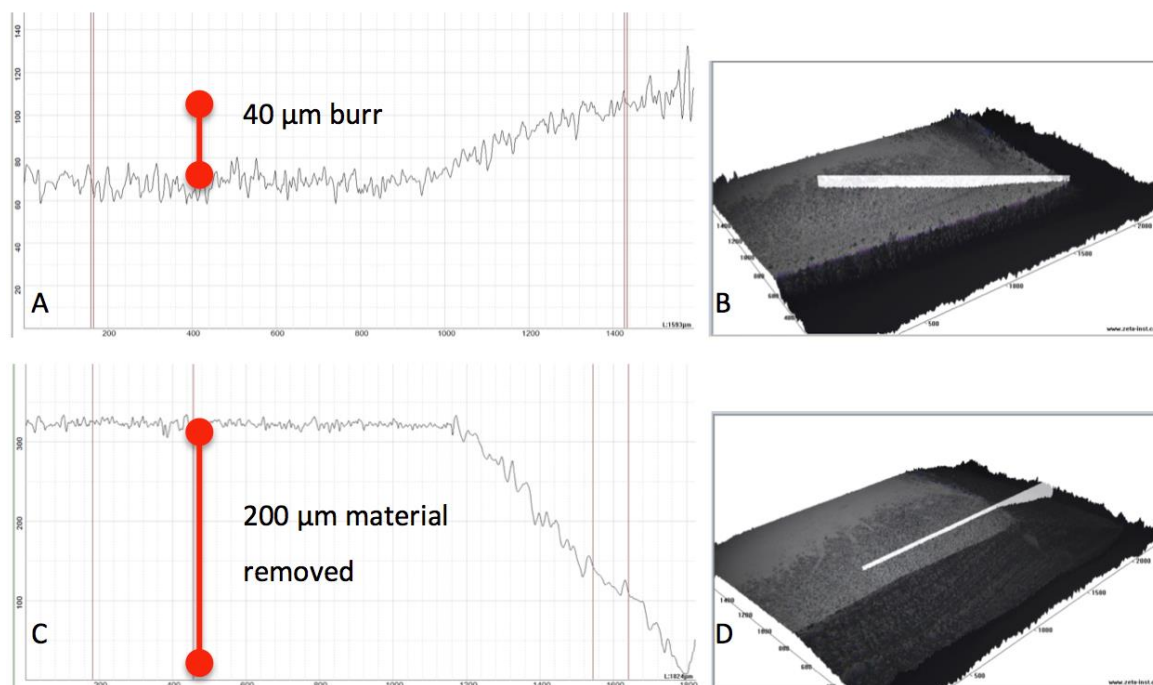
Profilometer images from before and after deburring. Panel A shows the profile of a laser cut PMMA chip. Panel B shows an image of the corner with the burr rising to the right. Panel C shows the profile after deburring. Panel D shows an angle image taken after the burr was removed.
